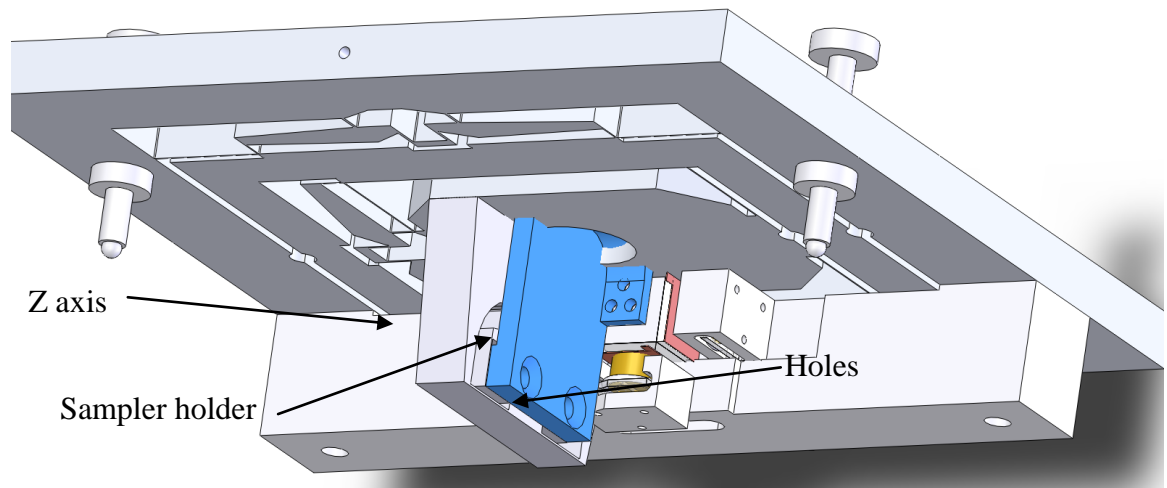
Sample holder issue 1 (Bottom view).
